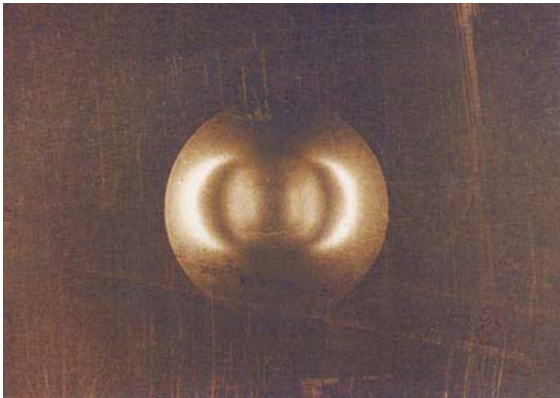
The deformed specimen after performing the Erichsen test on aluminum sheet without lubricant
